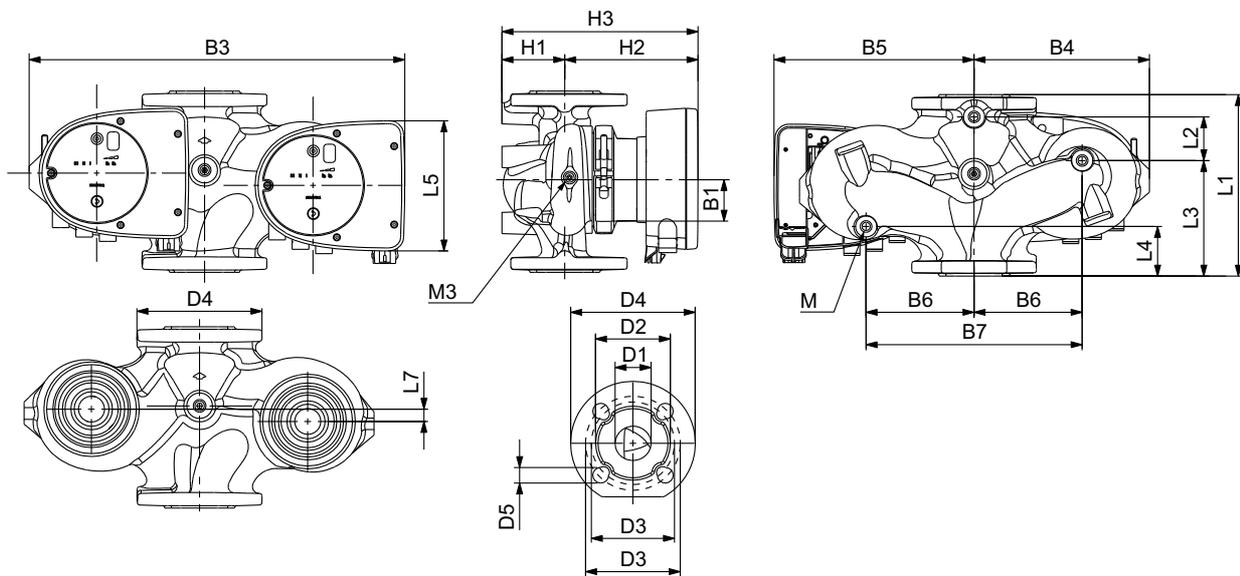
Twin-head pump dimensions, plug-connected versions, flanged version
